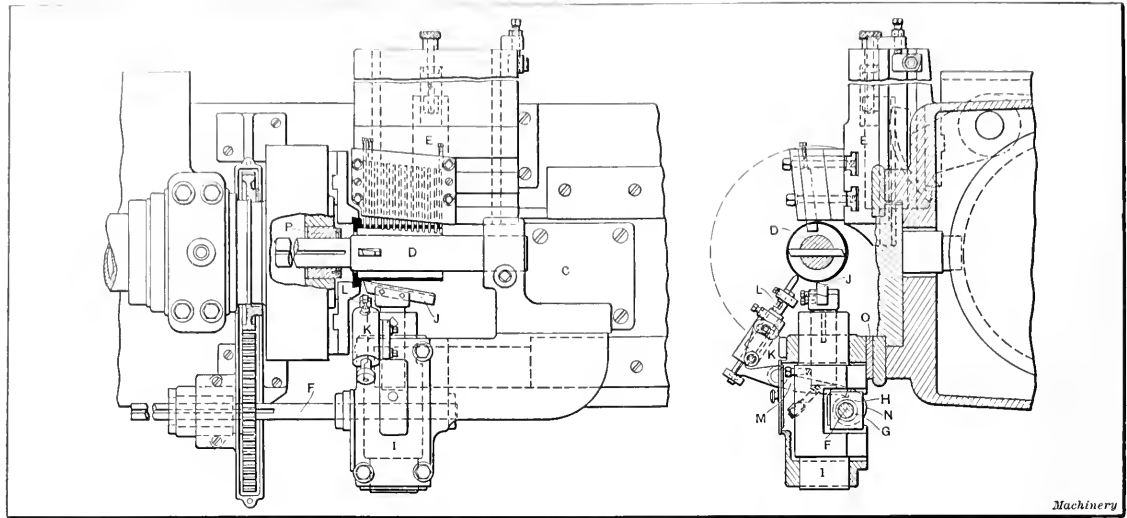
Plan View of Machine tooling for turning Piston-rings
